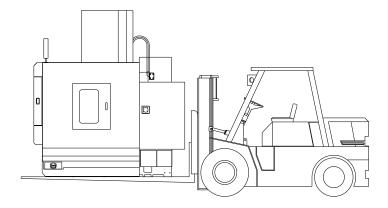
Handle the Unpackaged Machine by a Forklift
